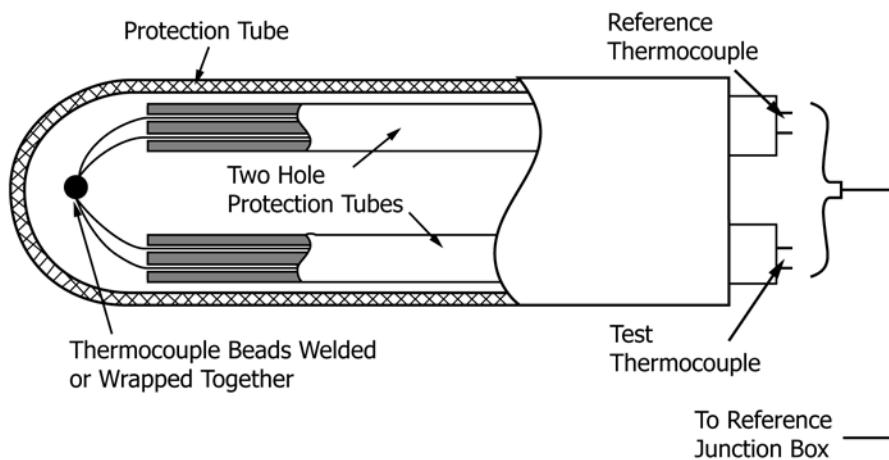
Thermocouple Assembly in Protection Tube (Multilayered Cutaway View)
